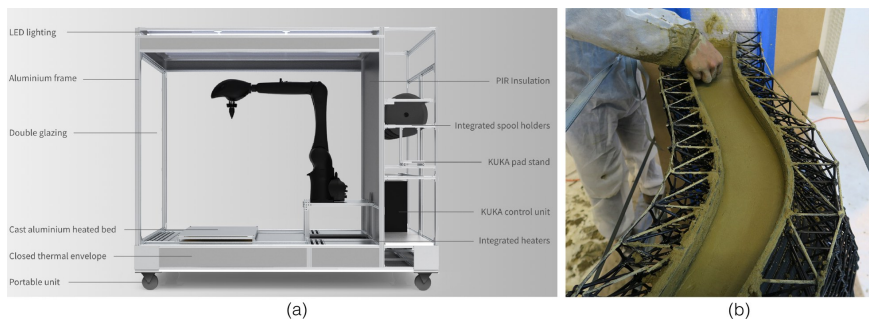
Commercially available large scale 3D printing: (a) The AI-Maker of AI-Build; (b) concrete formwork case study (photo credit: AI-Build).
